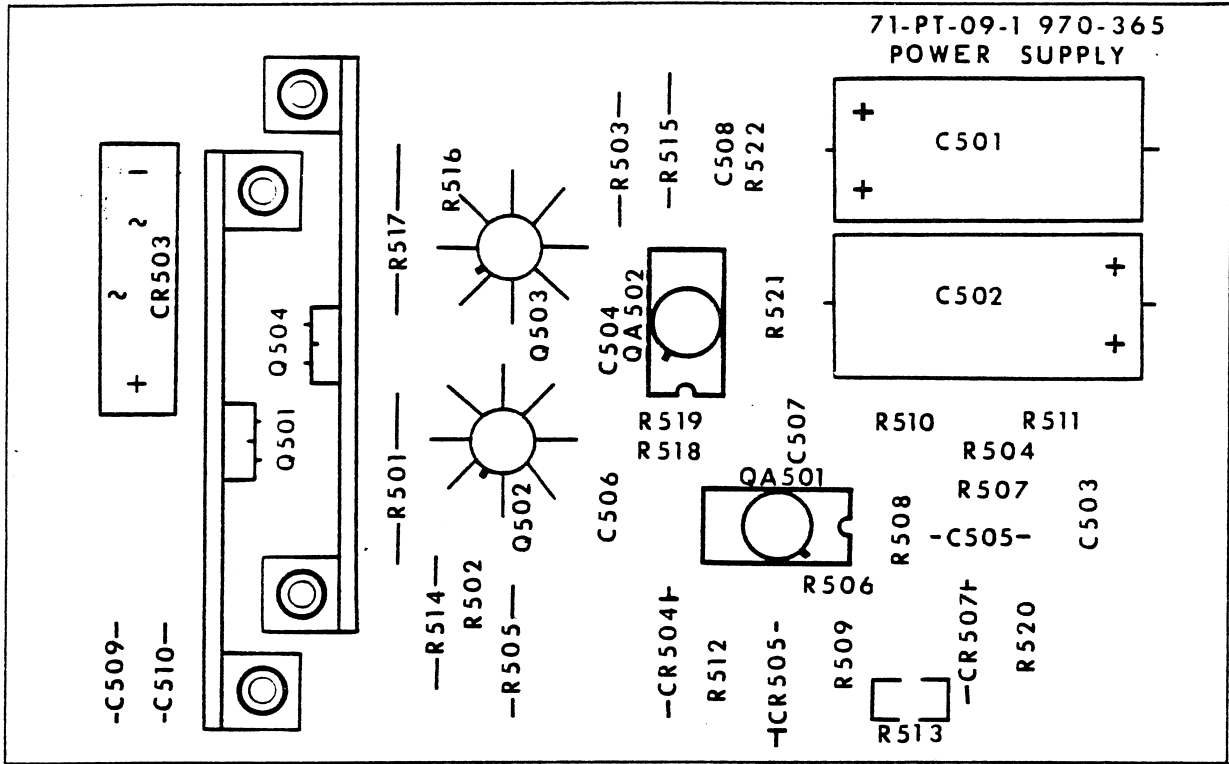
J1 Power Supply Printed-circuit Board, code 900-371.
